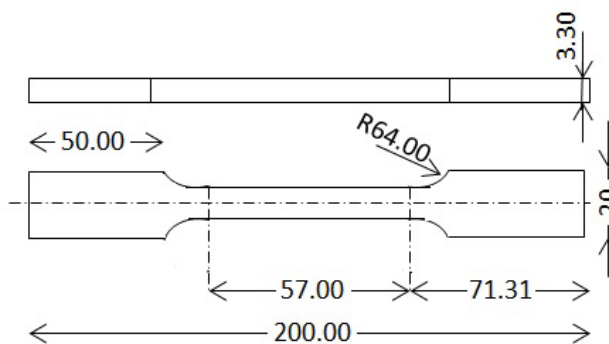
Samples for tensile tests (dimensions in mm) [11].
